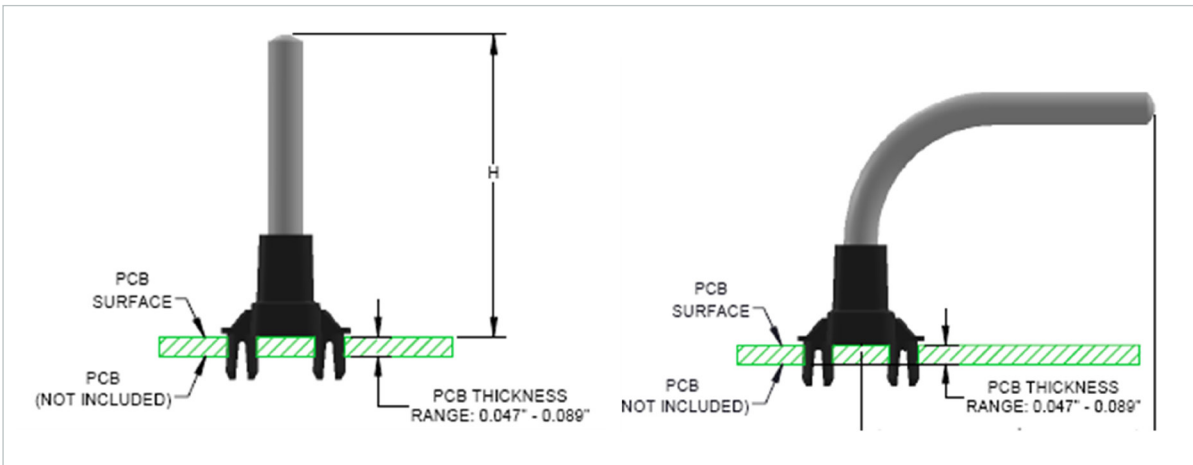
Firm-retention press-fit adapters provide extra stability with ribbed spreading prongs. They can be snapped into the board without tools, speeding assembly.
